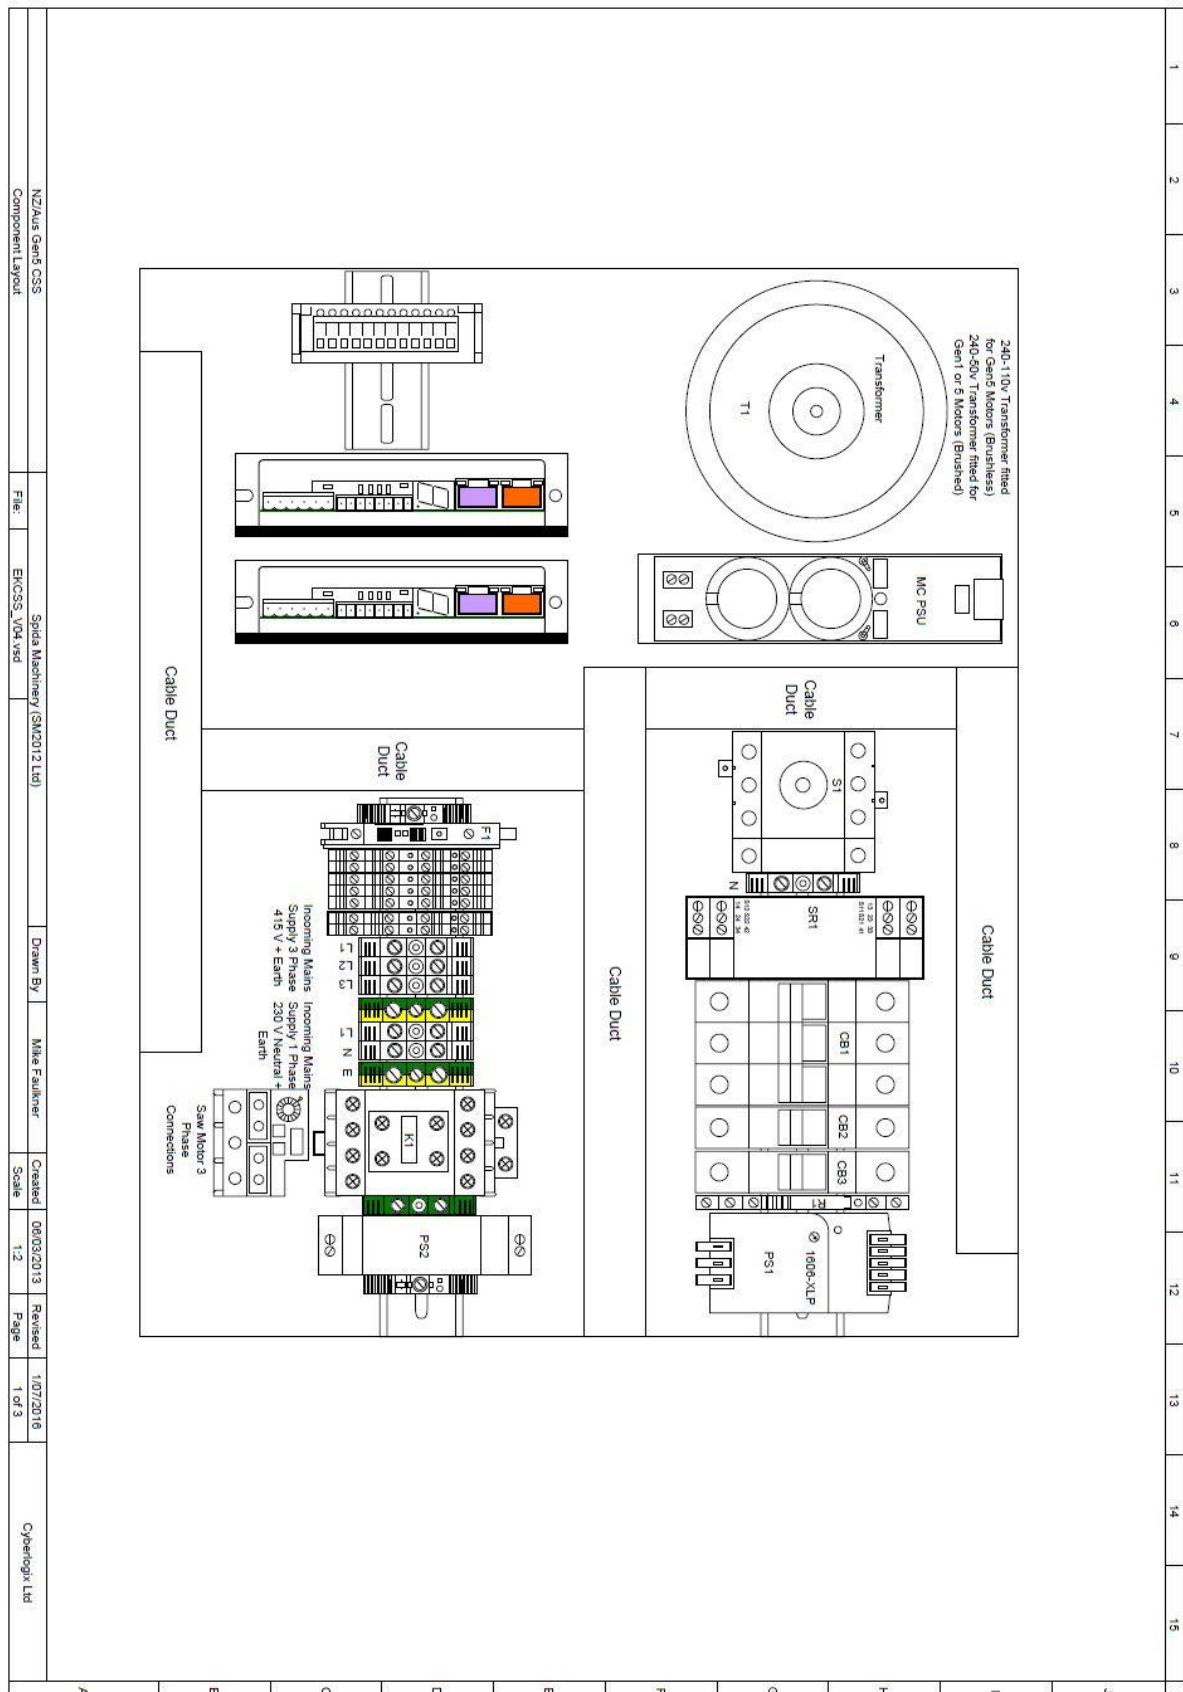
, CSS Vector Saw Electrical Drawings NZ/AU part 1
